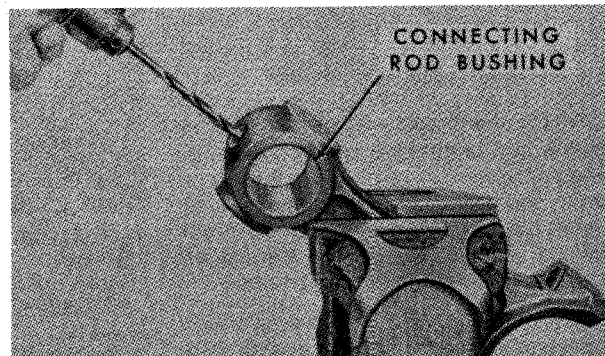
Oil hole in connecting rod bushing must be drilled after bushing is installed, but before reaming bushing to size. Hole in top of connecting rod is 0.045-0.050 inch and must not be drilled oversize.
